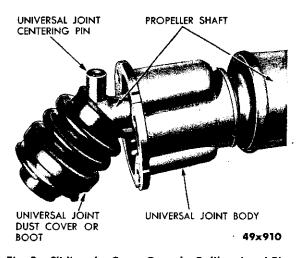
Sliding the Cover Over the Ballhead and Pin
